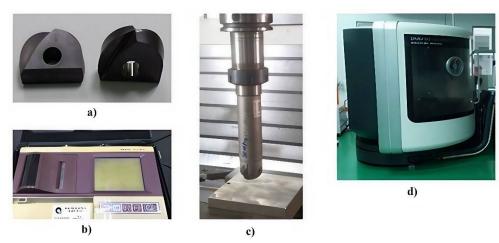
(a) Cutting tool, (b) Mitutoyo surface roughness tester used for measuring surface roughness, (c) Configuration setting prior machining trial and (d) 5-axis CNC machine (DMU 60 Monoblock 5-axis)
